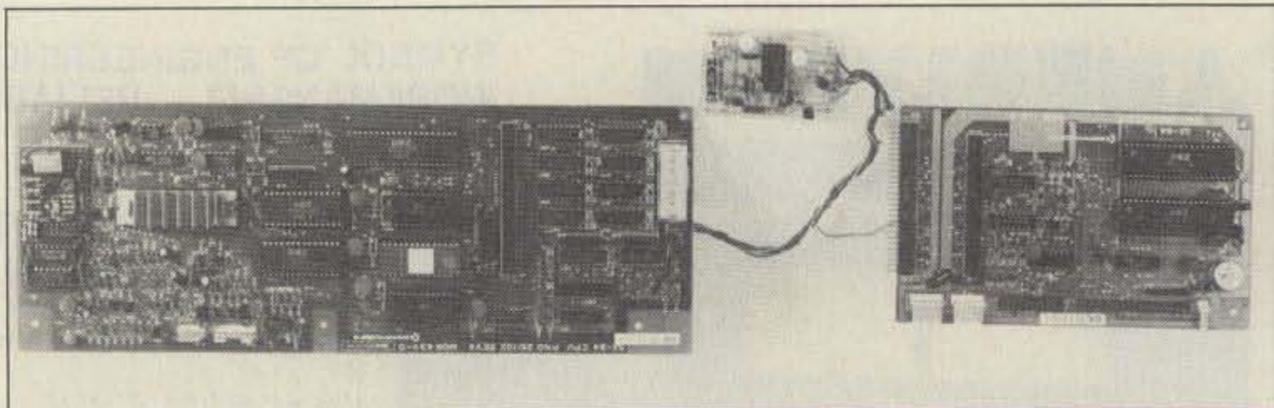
Photo B. You can safely solder the leads from the Digicom modem (top) to the solder side of the SX-64's CPU board (left) and I/O board (right), using a low wattage, grounded iron. Work patiently, use solder sparingly, and avoid bridges.
